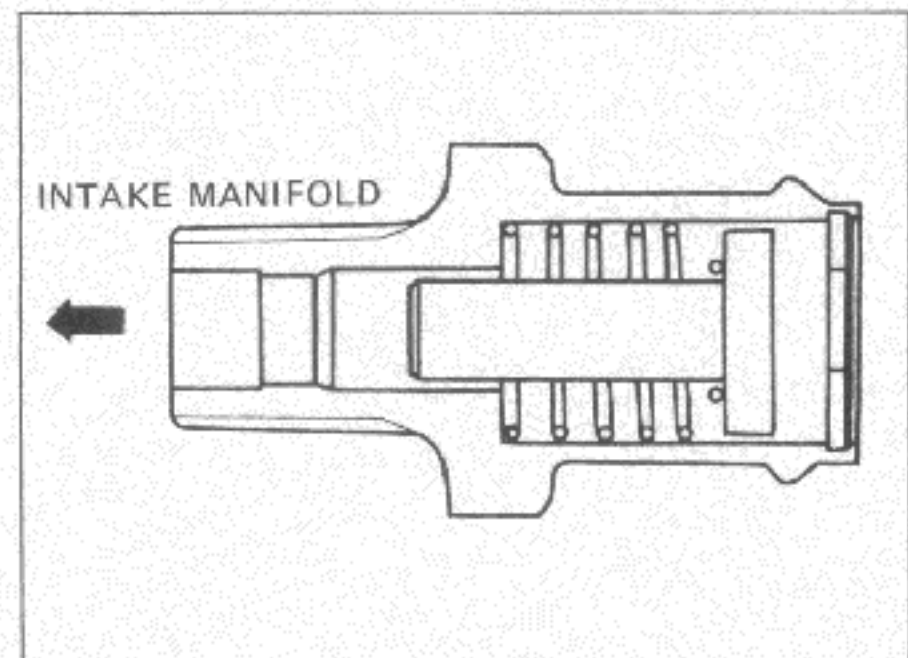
Cross-sectional view of crankcase ventilation control valve
